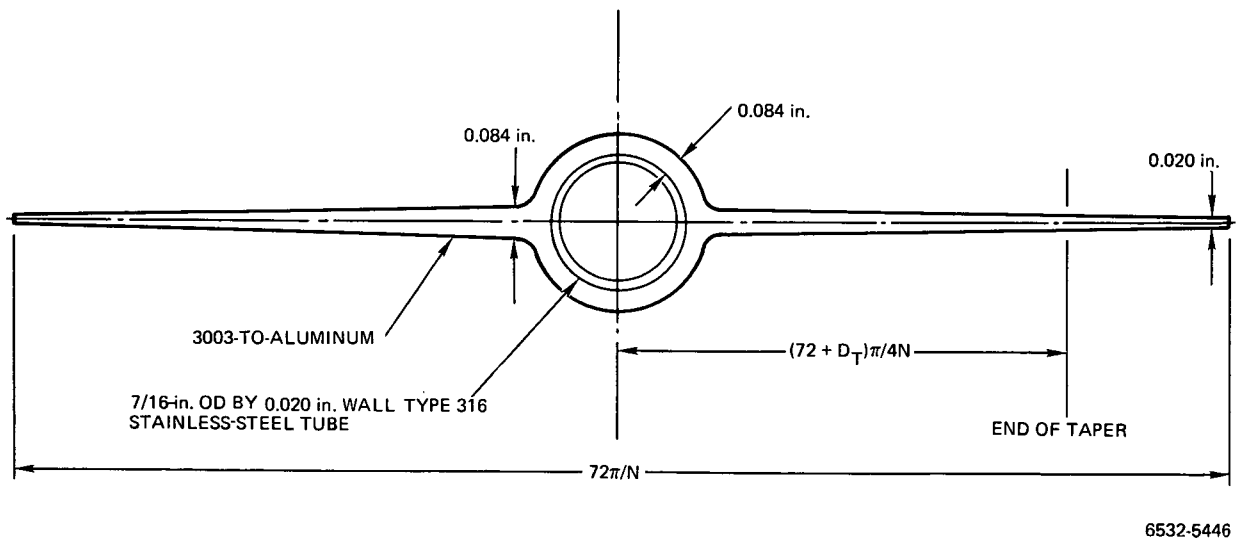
Symmetric Aluminum Fin and Stainless-Steel Tube Cross Section
